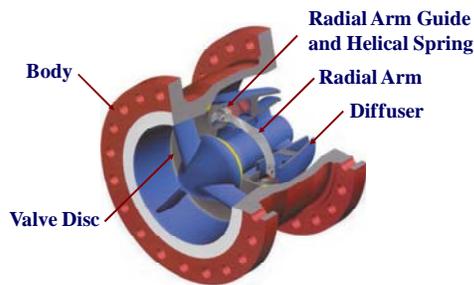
SCHEMATIC OF A RING DISC NOZZLE TYPE CHECK VALVE SHOWING THE RADIAL GUIDES AND GUIDE ARMS AND SPRINGS – REF. [20].
